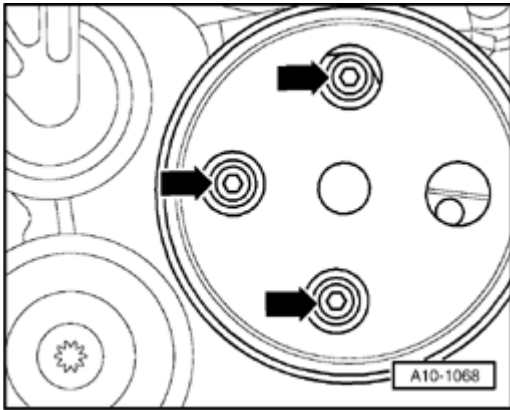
Unbolting Power Steering Pump At Ribbed Belt Side
